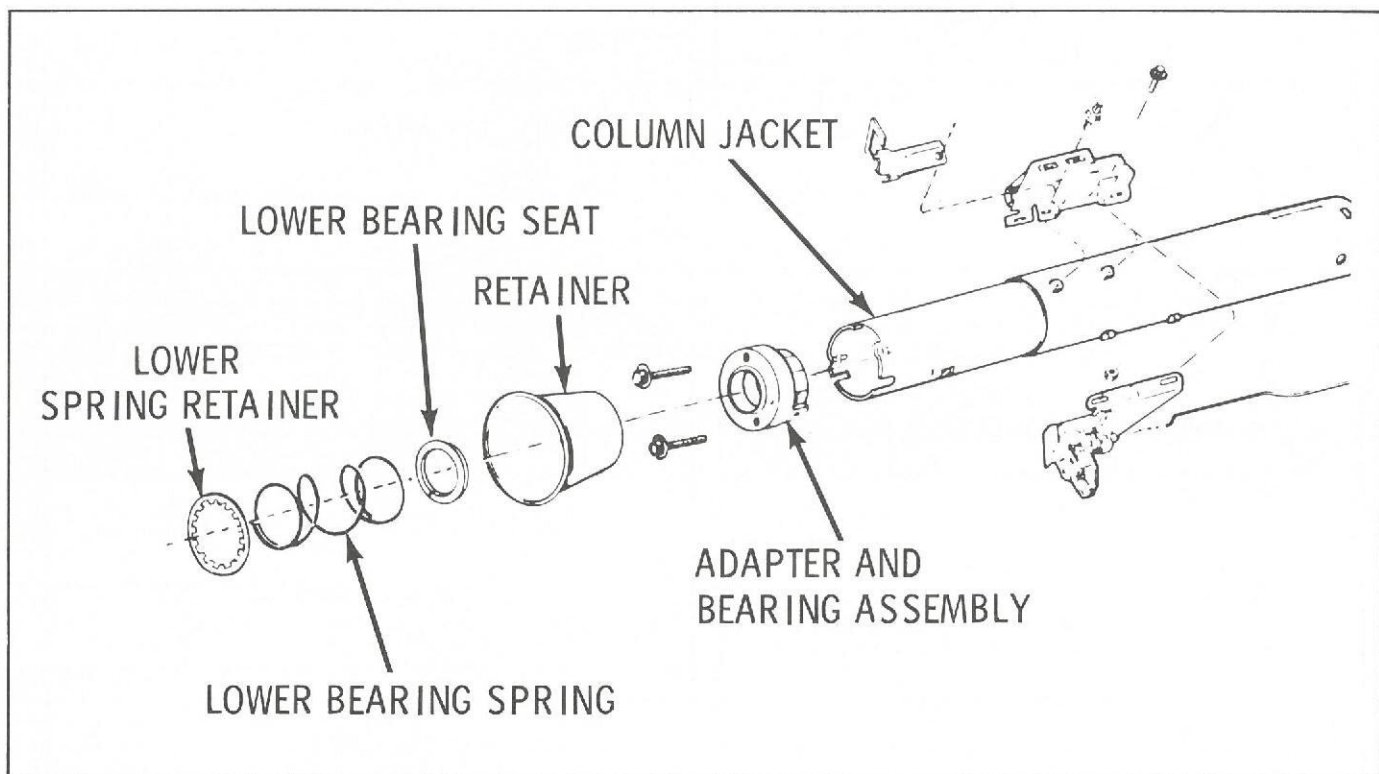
Steering Column Lower Bearing Retainer - Omega & Cutlass Ciera
